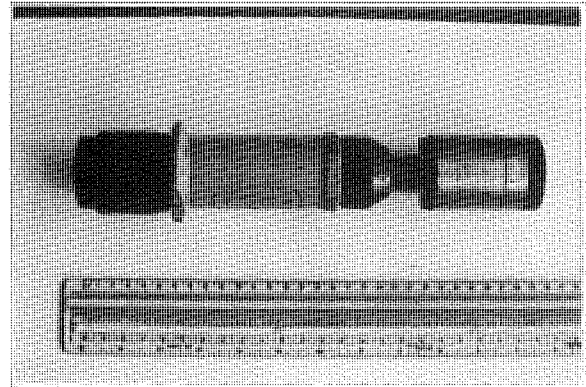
(a) Photograph of the assembled spot welding gun
